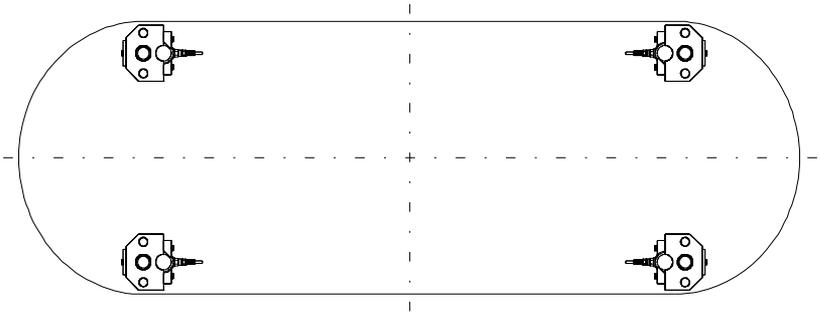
HORIZONTAL TANK - 4 LOAD POINT ASSEMBLIES
